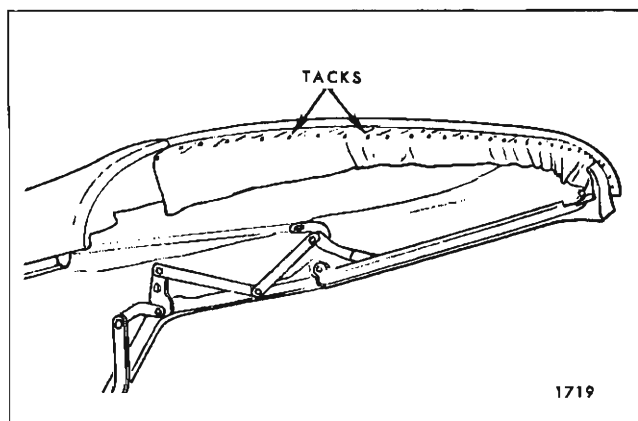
I-37 — Installation of Top Material To Front Roof Rail
